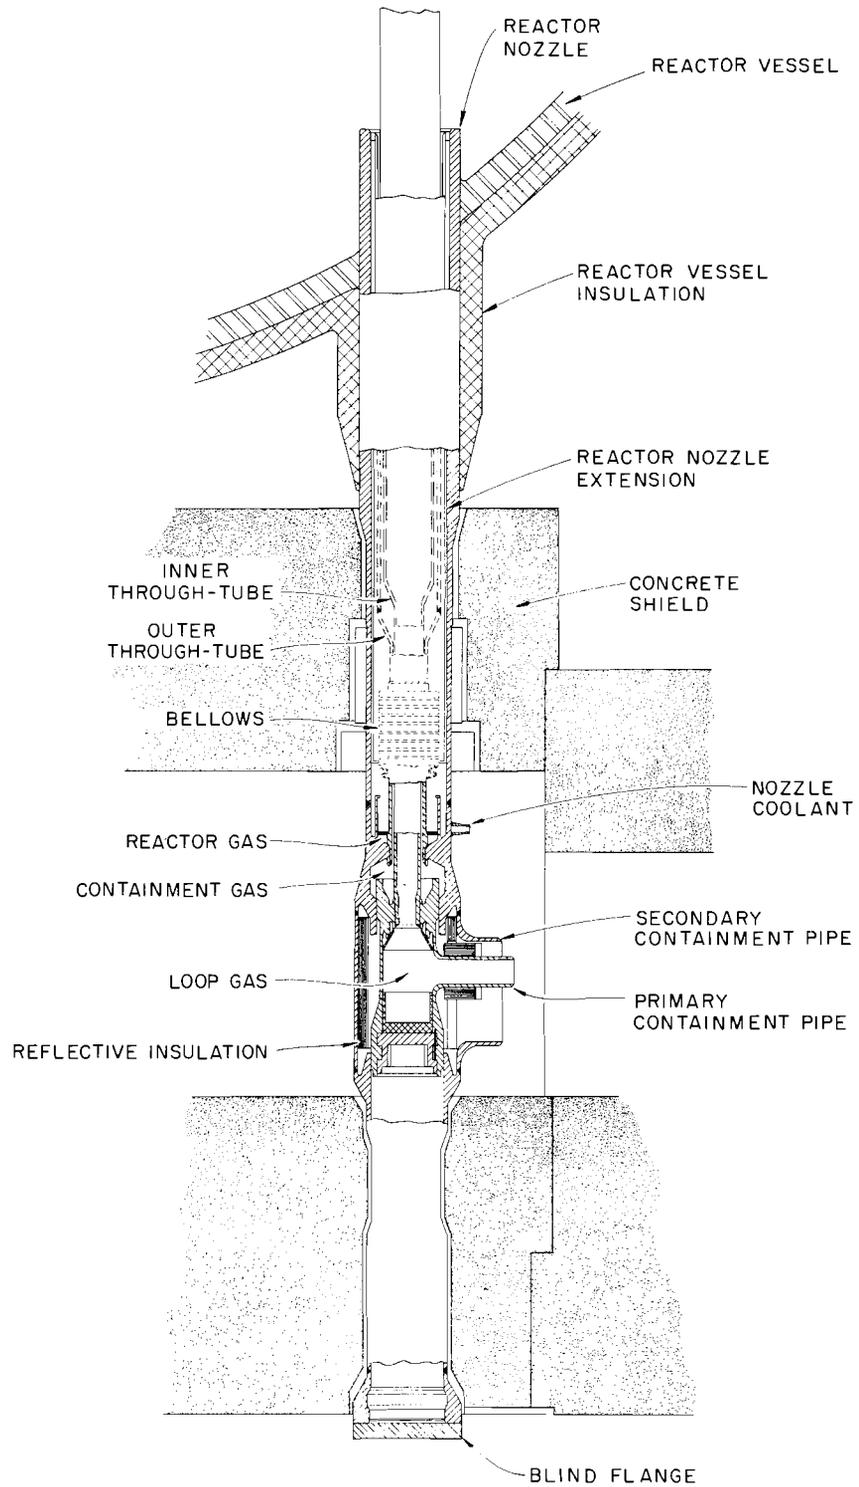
Bottom Nozzle Tee Section for 9 1/2-in.-o.d. Double-Walled Through-Tube.
